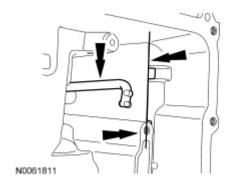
Making Sure That Park Pawl Actuator Rod Does Not Become Disengaged From Park
